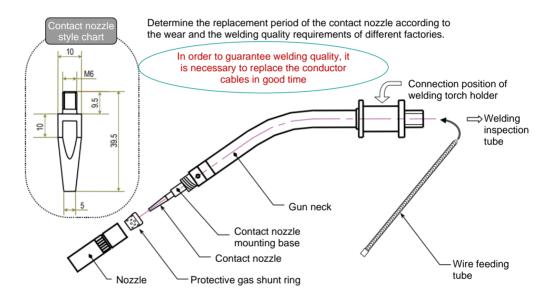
Introduction and precautions of components of welding torch
